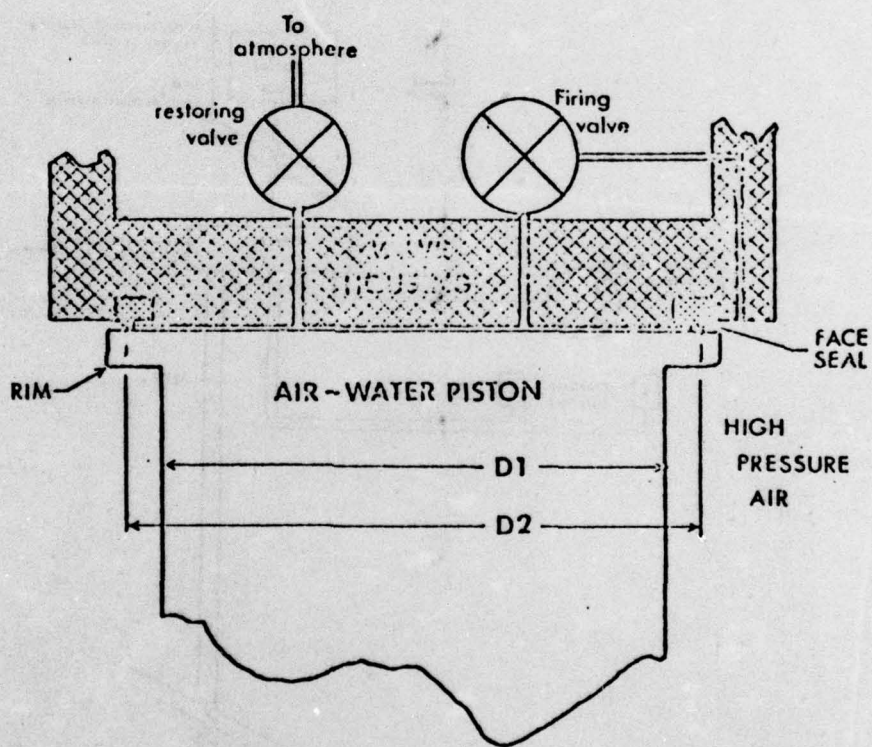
Detail cross section of the face seal between the air-water piston and the valve housing. D1 is the diameter of the air-water piston and D2 is the diameter of the face seal.
